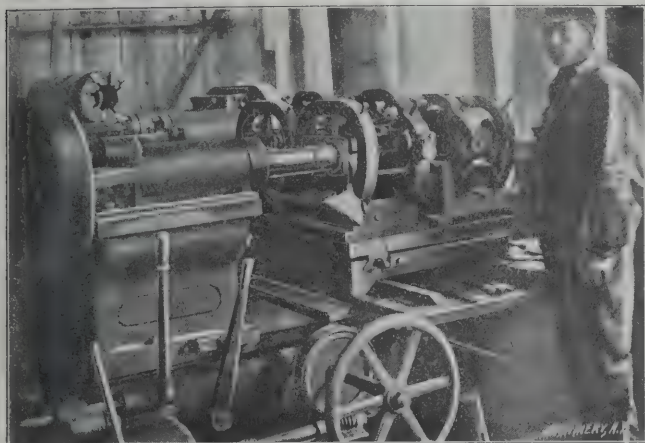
Boring out Cylinders on a Beaman & Smith Machine
